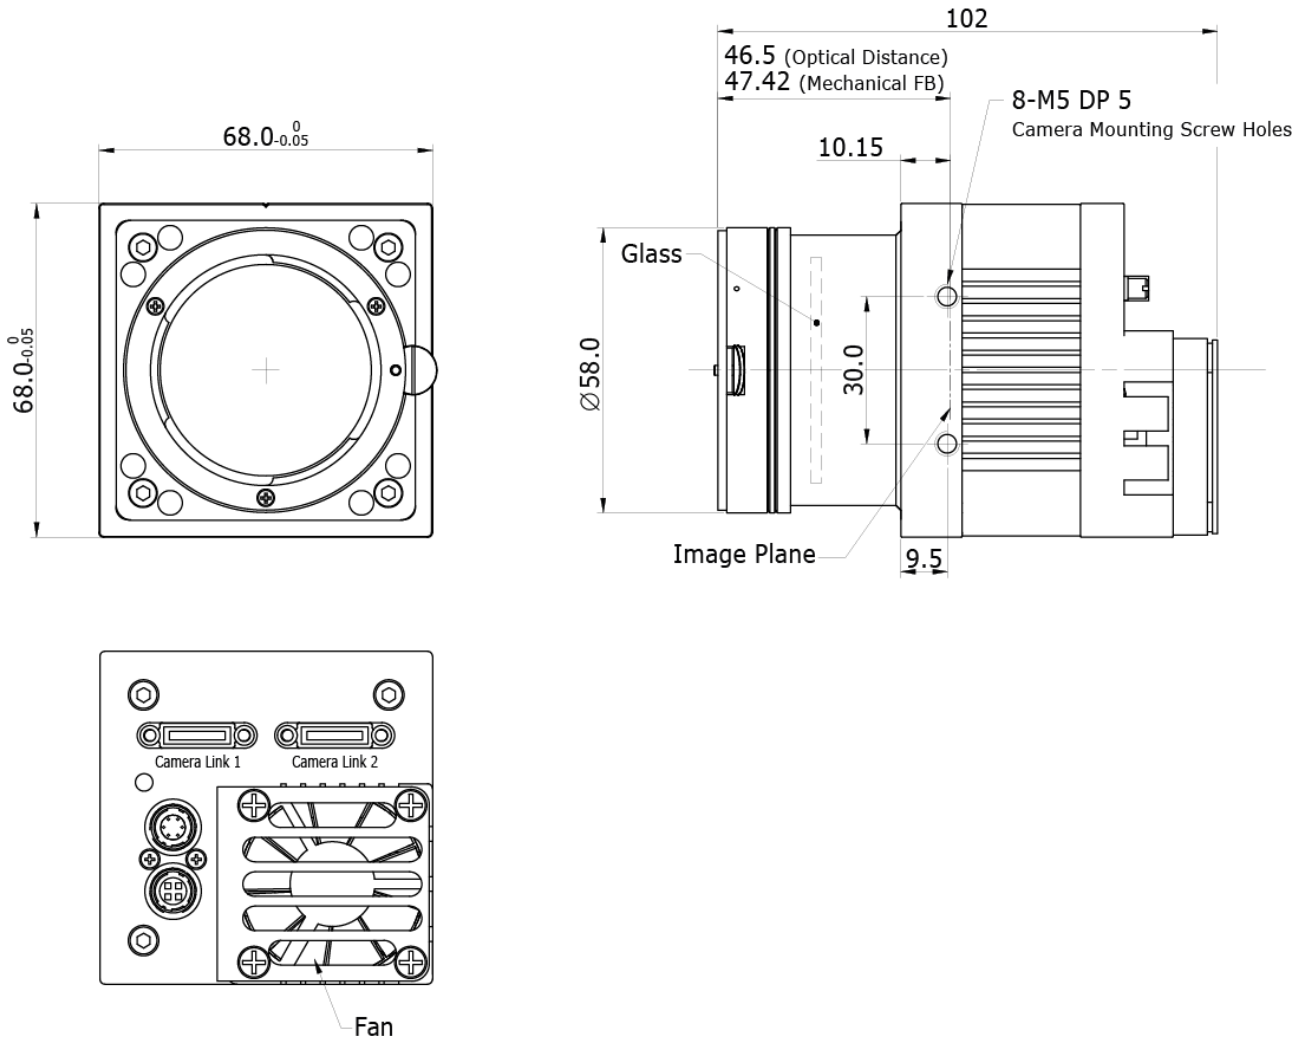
VC-50MC F-mount Mechanical Dimension
